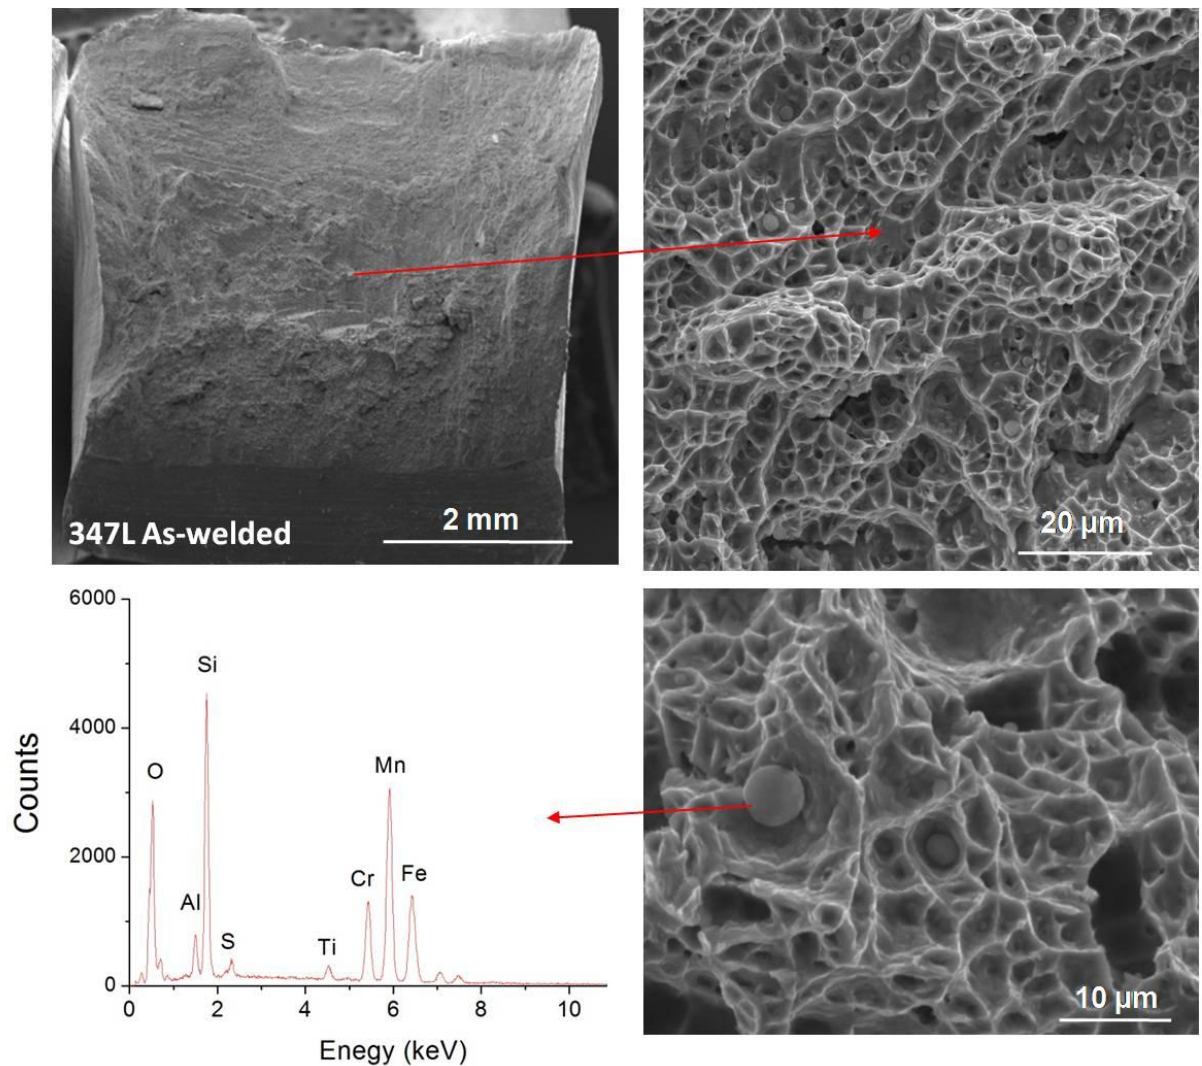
Fractography of 347L in the as-welded condition
